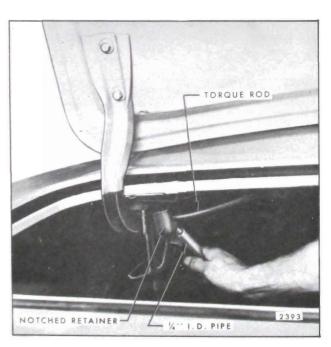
Rear Compartment Torque Rod Adjustment – Chevrolet "F" Styles
